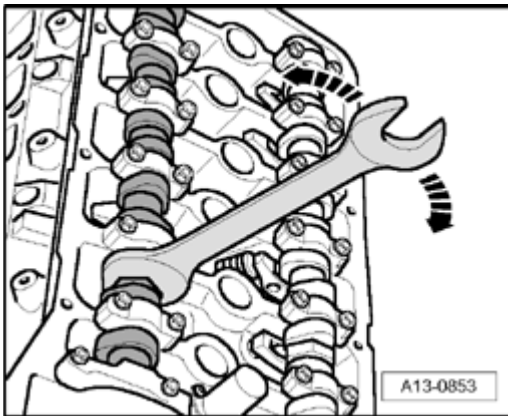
Turning Camshafts Back And Forth Slightly Using An Open-End 32 Mm Wrench
